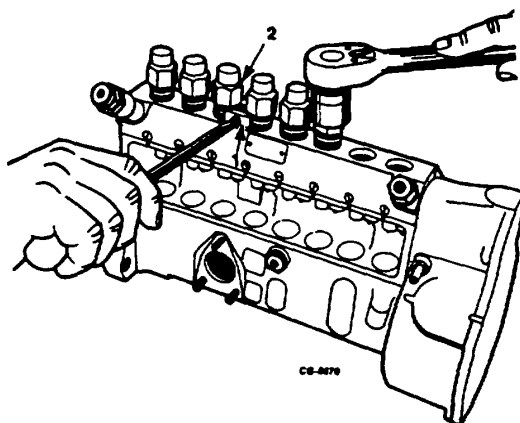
Removing Holder Clamps and Delivery Valve Holders
